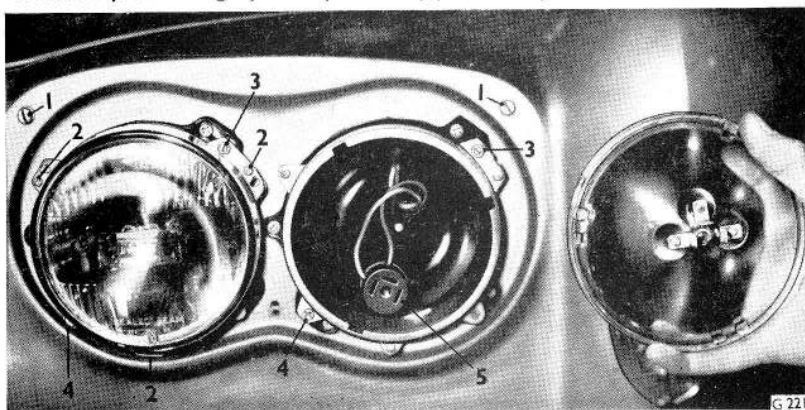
ACCESS TO THE SEALED BEAM UNITS
